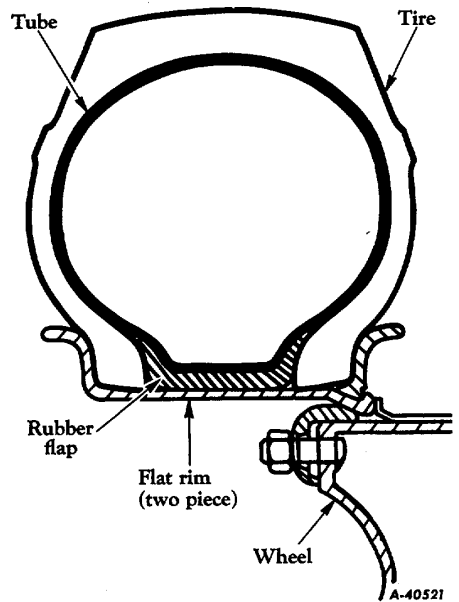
Dual Cast Wheel and Two Piece Rim (with Tube)
